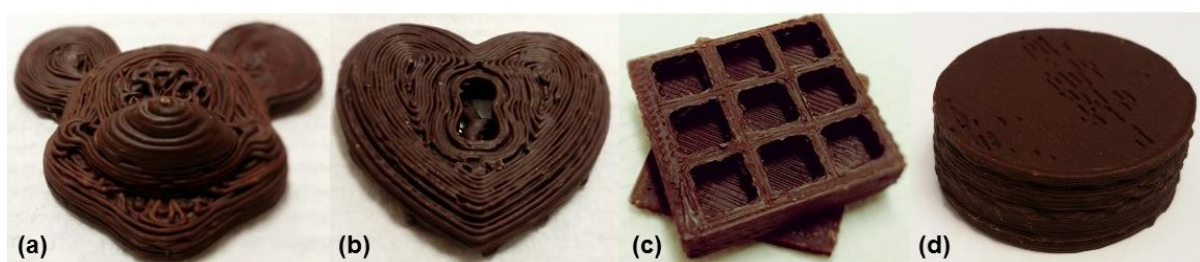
3D chocolate printed using Porimy 3D printer (a) mickey mouse shape (b) heart shape (c) box with hollow square hole (d) cylinder shape. (Printing condition: Speed 70mm/s, Nozzle size 0.78mm and extrusion temperature 32 °C).
